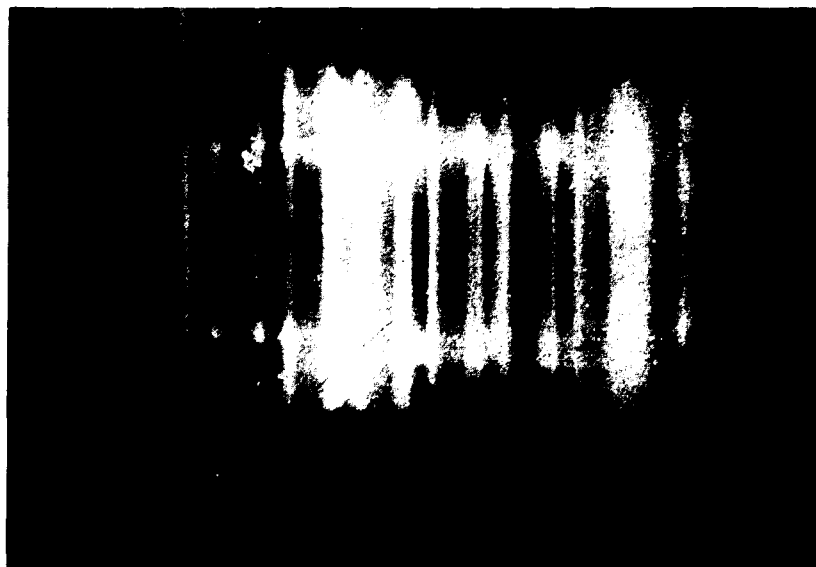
Radiograph of a stainless steel joint inside two stainless steel tubes taken at 275 kV.
